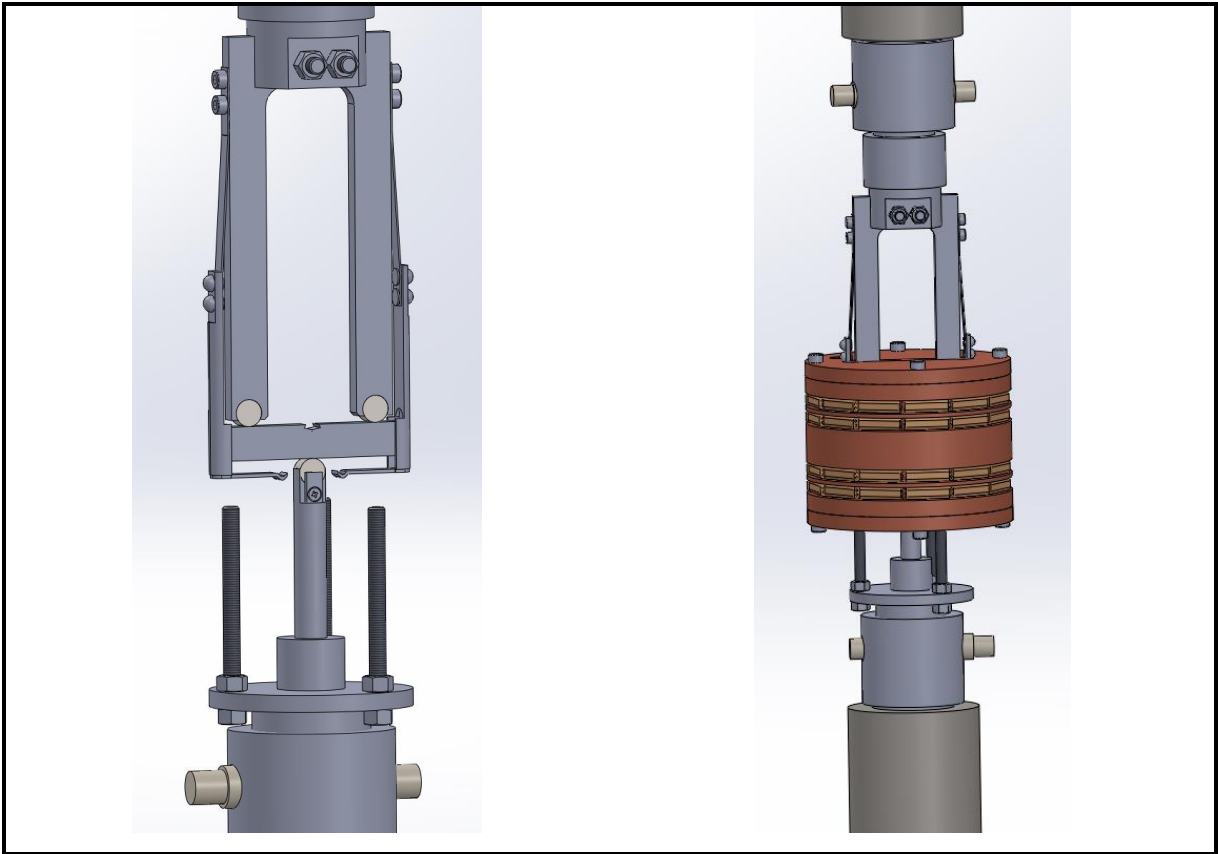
3D model of the press tool and cooling-heating equipment designed for fracture mechanics tests
